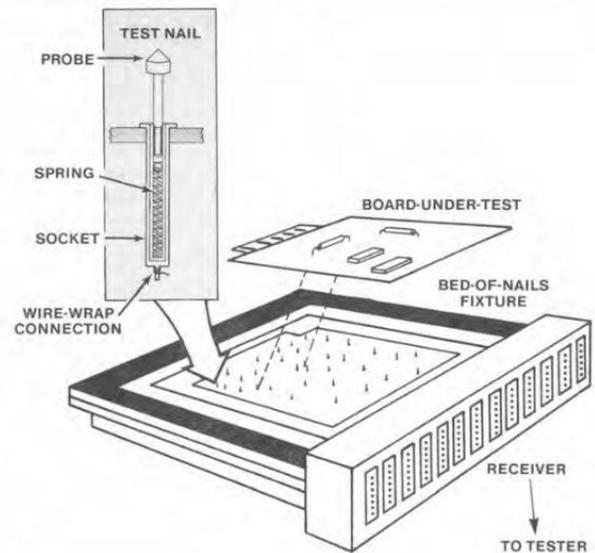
ICT System with Pins Contacting Board Under Test [8]
